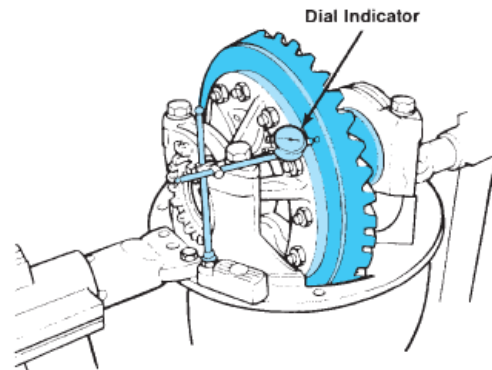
Adjustment procedure used to achieve preload to the differential assembly bearings
